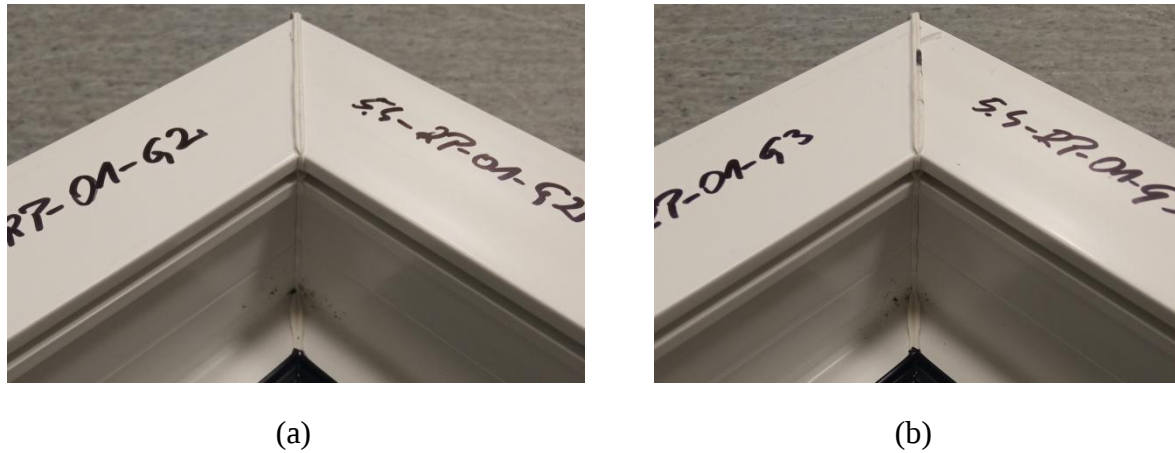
Representative welds from preliminary specimens: (a) second welding head, (b) third welding head [14]
